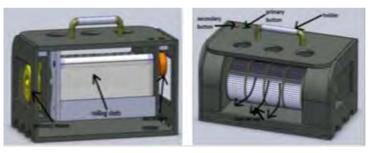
Concept drawing of Portable Car Cool system (Basar et al., 2013)
